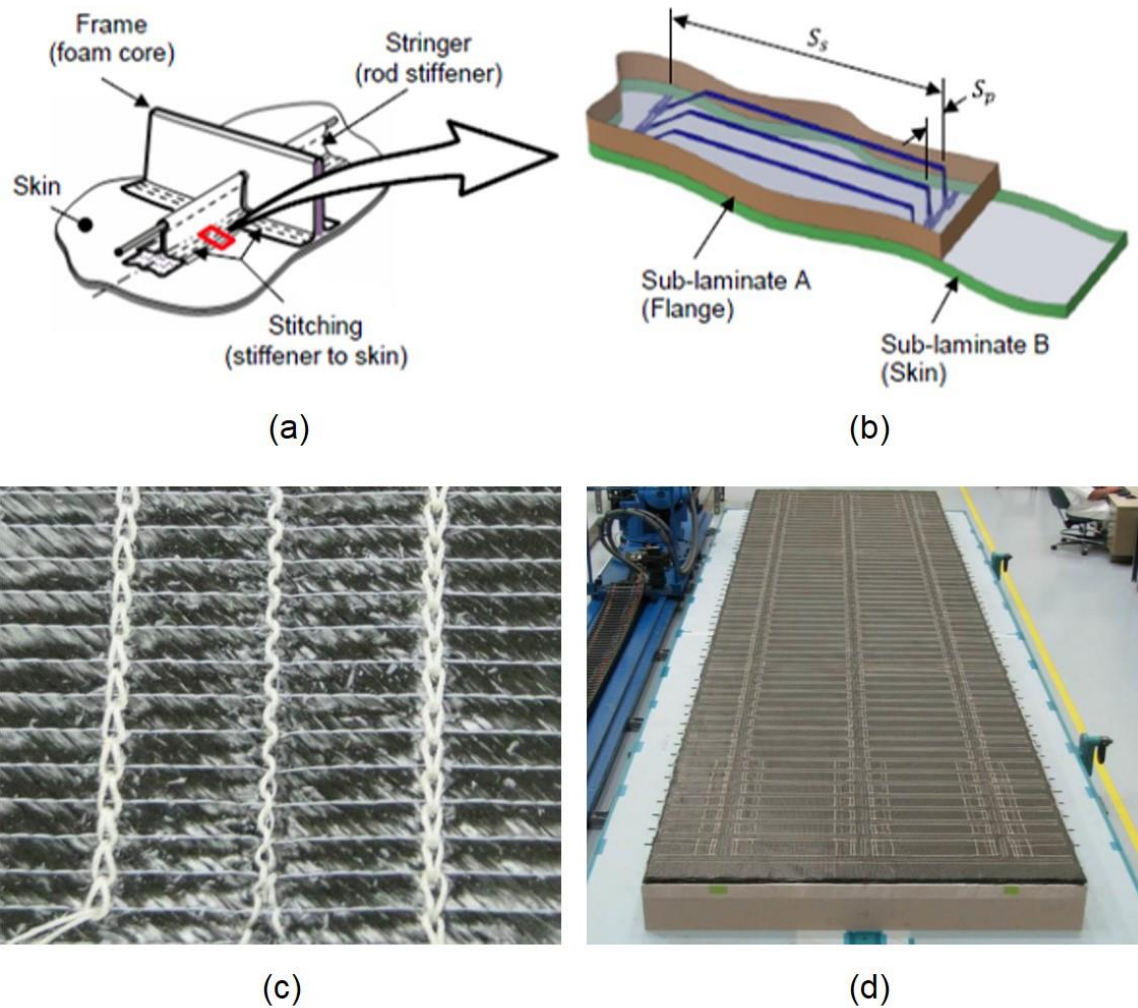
Single-sided stitching for the PRSEUS concept: (a) frame/stringer intersection (adapted from [21]), (b) flange-to-skin stitches [21], (c) single-sided stitch seam (adapted from [4]), and (d) a complete flat PRSEUS panel preform after stitching (adapted from [4]).
